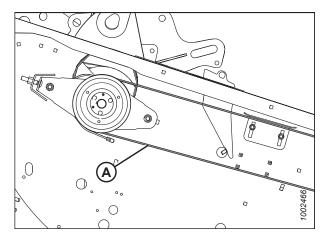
Knife Drive Belt and Drive Pulley – Right Side
